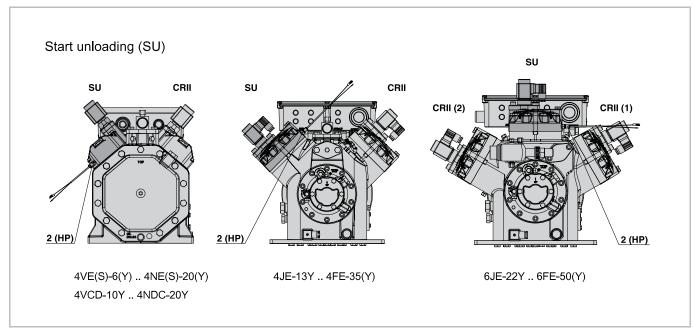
Position of the cylinder heads and valve top parts for start unloading in case of factory mounting
